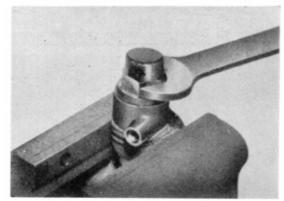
23 Removing Master Cylinder Cap 8. Take out piston cap and piston cap spacer.
